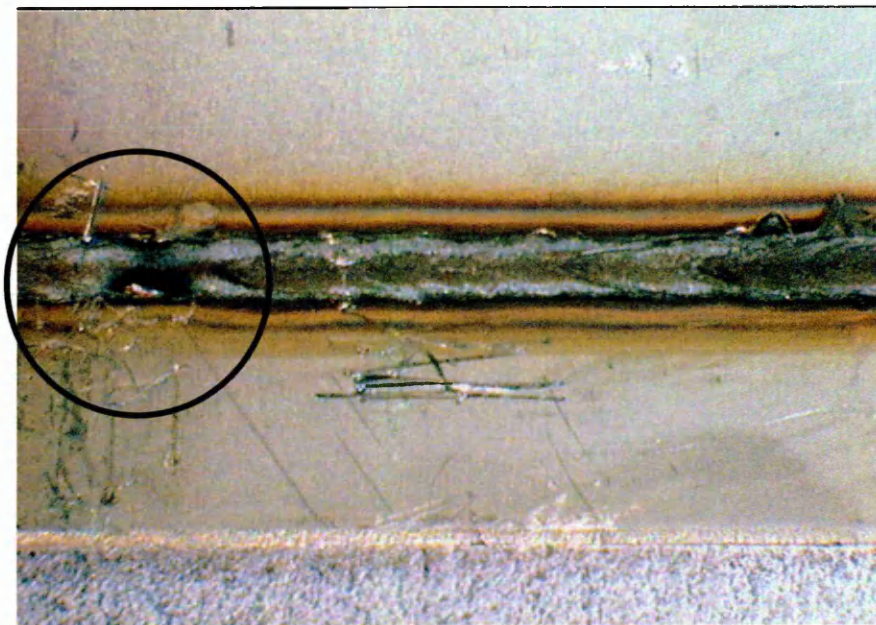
Weld bead surface porosity in a 1mm 304 (top) – 1.2mm V1437 laser welded lap joint
